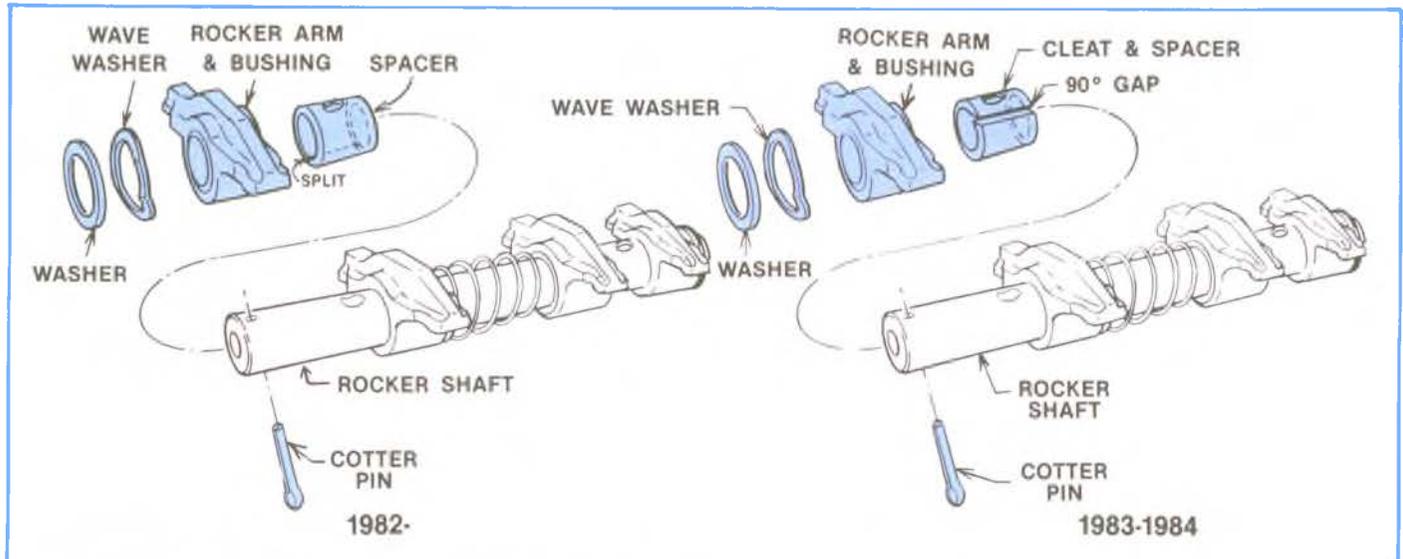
, 1982-1984 Rocker Arm Assembly.
